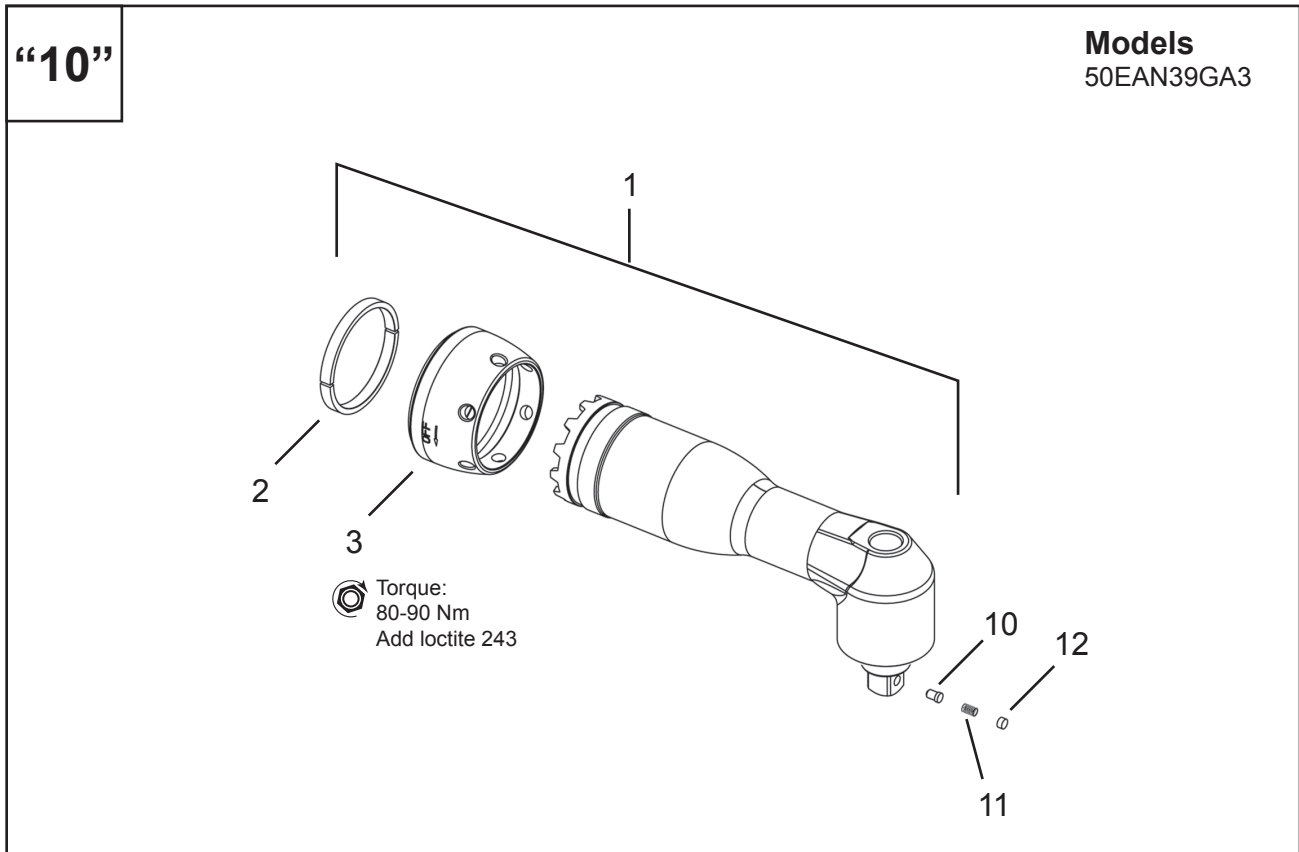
”: 302190PT Angle Head Attachment (GA3)
